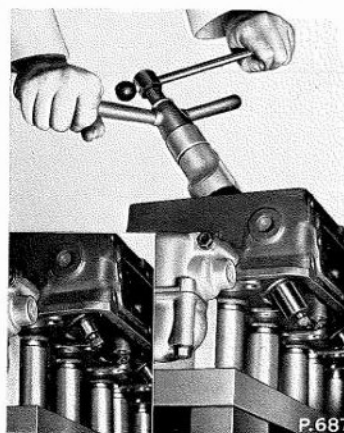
Fitting new valve guides, using the Churchill Tool R.G.10A and the adaptor sets R.G.10A-5A and R.G.10A-6 (Inset shows the method of valve guide removal)
